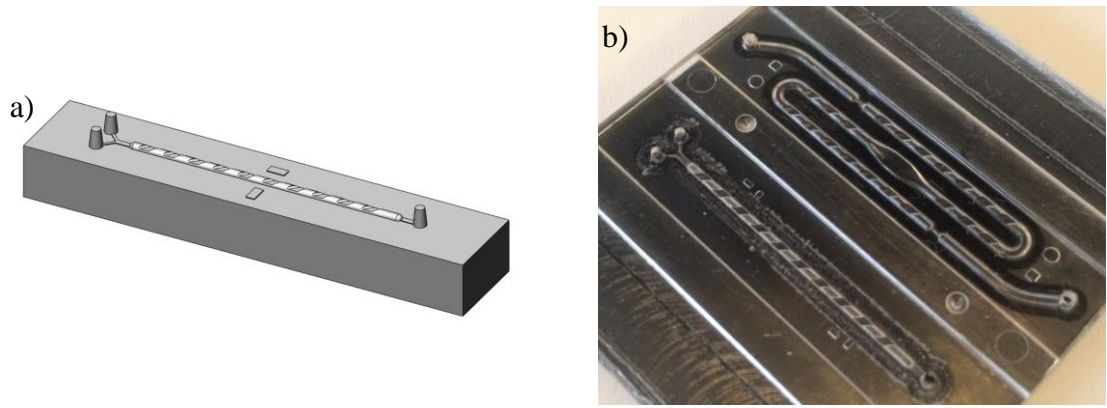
a) Micromixer insert design. b) Welded insert used in micromixing and immunoassay tests
